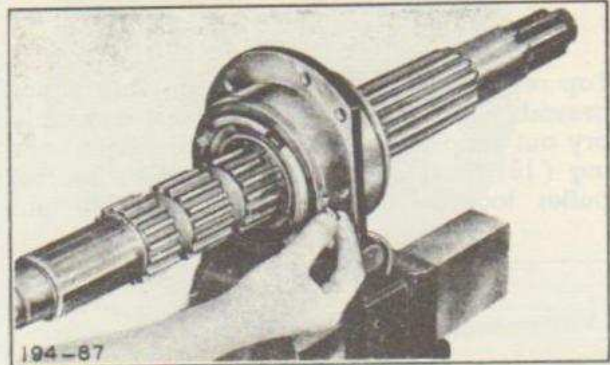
Removing Center Bearing Retainer Nut Setscrew
